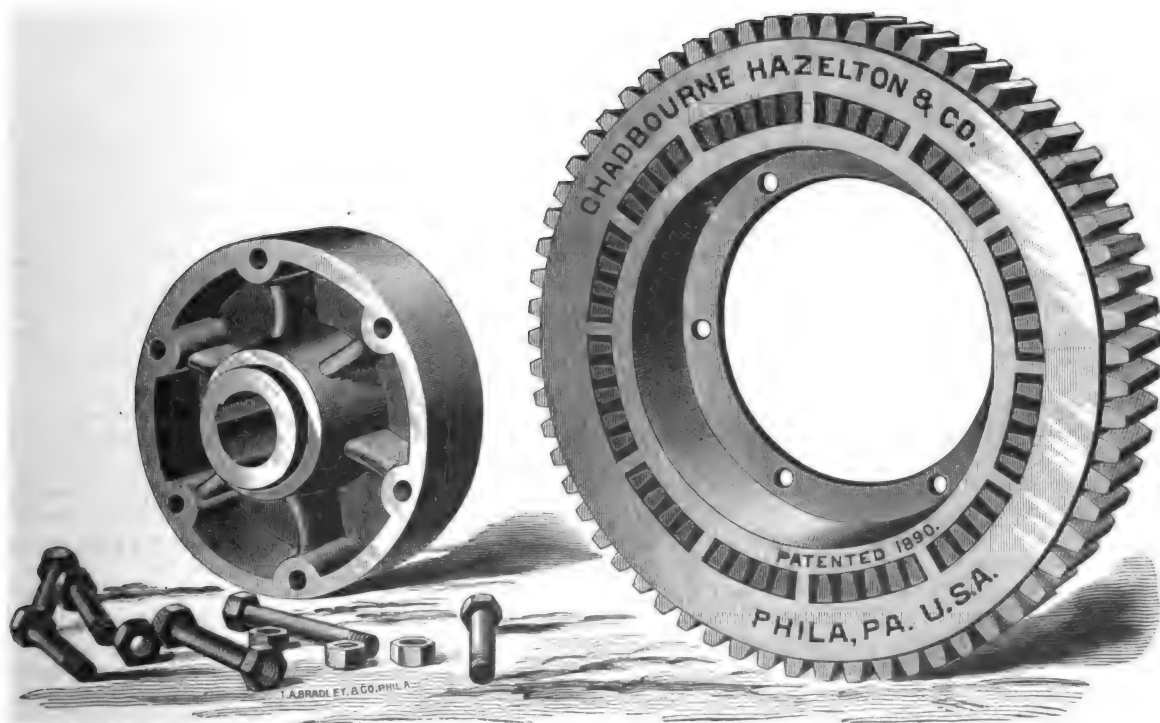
INTERMEDIATE GEAR, SHOWING RIM REMOVED.
